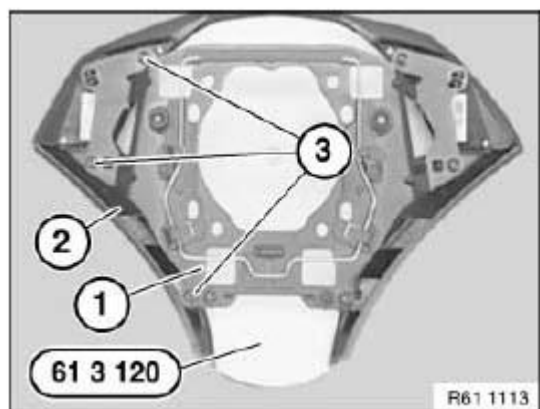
Identifying Steering Wheel Retaining Plate With Decorative Strip
